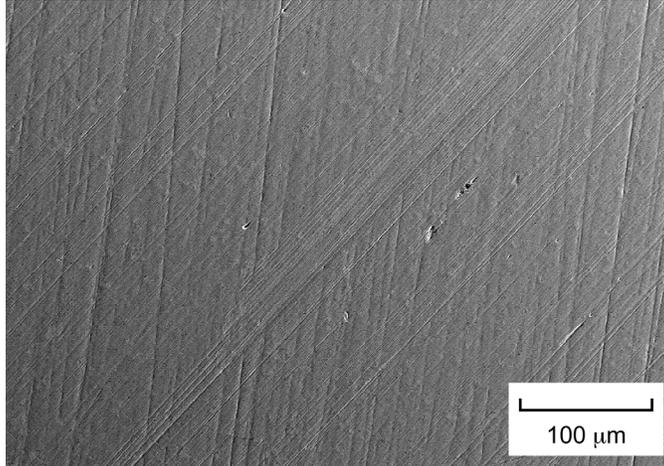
Post-test 60NiTi inner race (ball) surface showing that original machining marks remain (250x).
